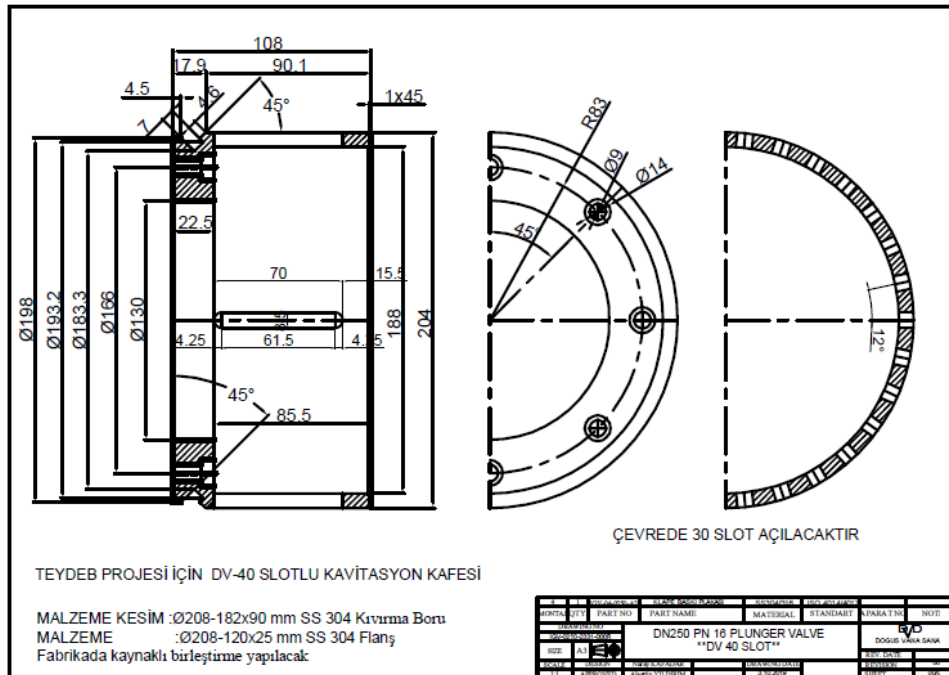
Technical Drawing DV 40 Slot of DN 250 Plunger Valve
